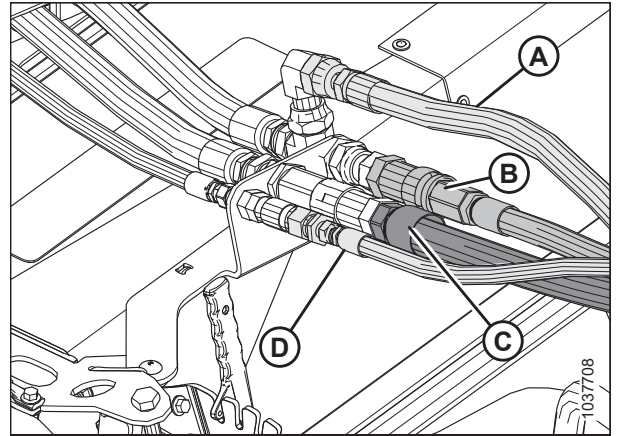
Windrower Hydraulic Hoses Connected to Header — View from Rear of Header
